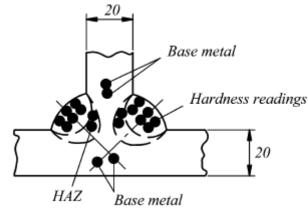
Sketch of hardness readings on the macrosection of tee-joint assembly
